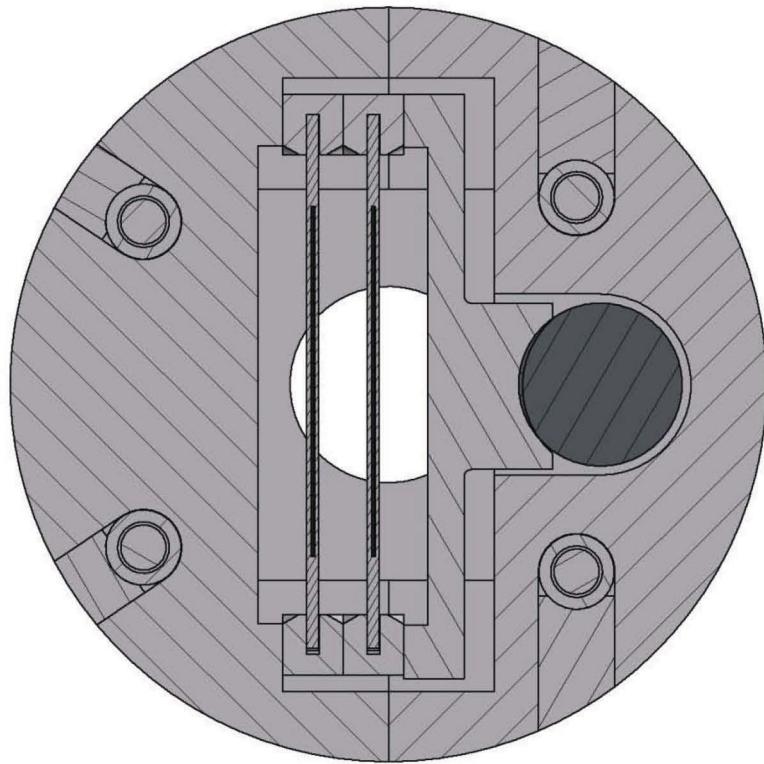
Radial Cross Section of the AFIP Test Train Assembly.
